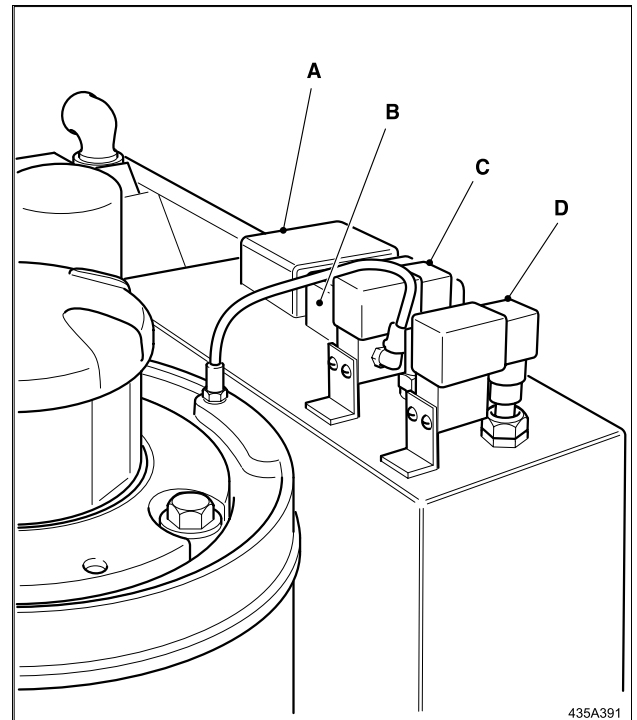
Pressure Switch Locations (7.5kW machine illustrated)
